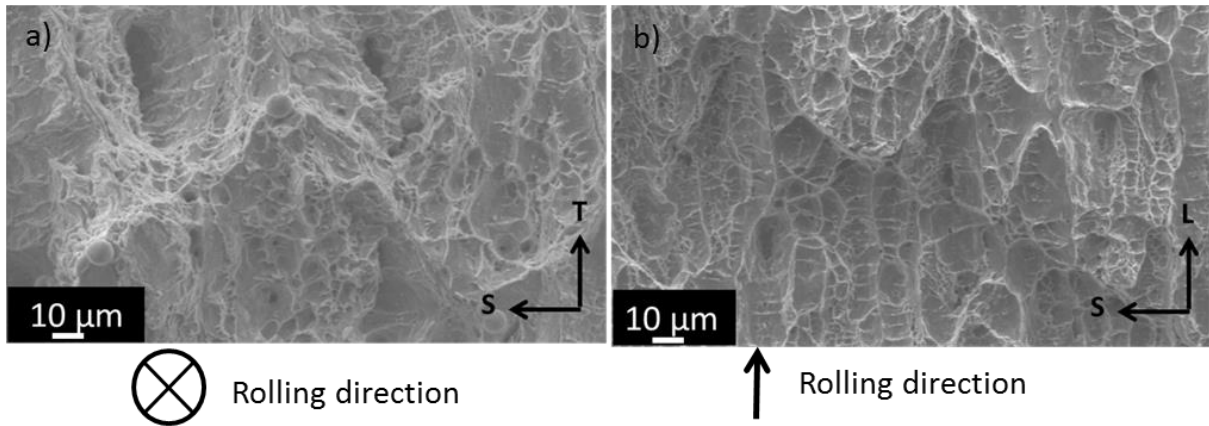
SEM images of the fracture surfaces at RT showing equiaxed dimples in (a) L-T oriented specimen and flat dimples in (b) T-L oriented specimen of ODS-KIT HR.
